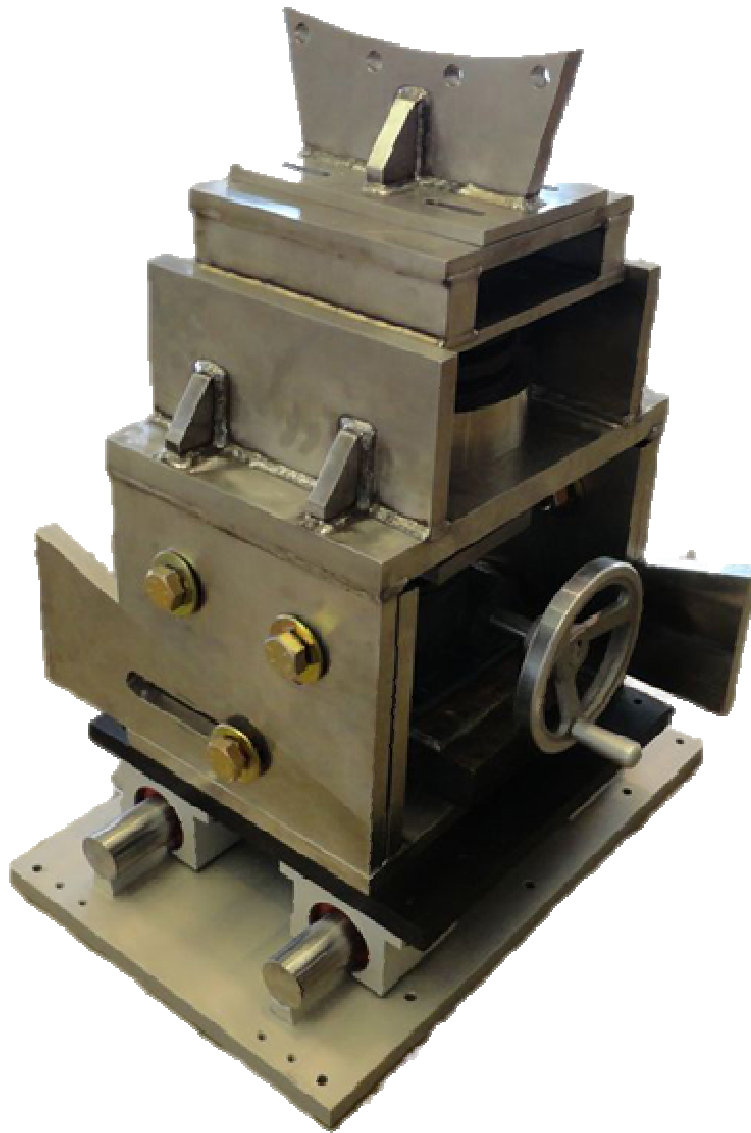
One side of the jack has a hand wheel while the other has a hex connection for a pneumatic wrench. At this point, the engine alignment is ready to be set.
